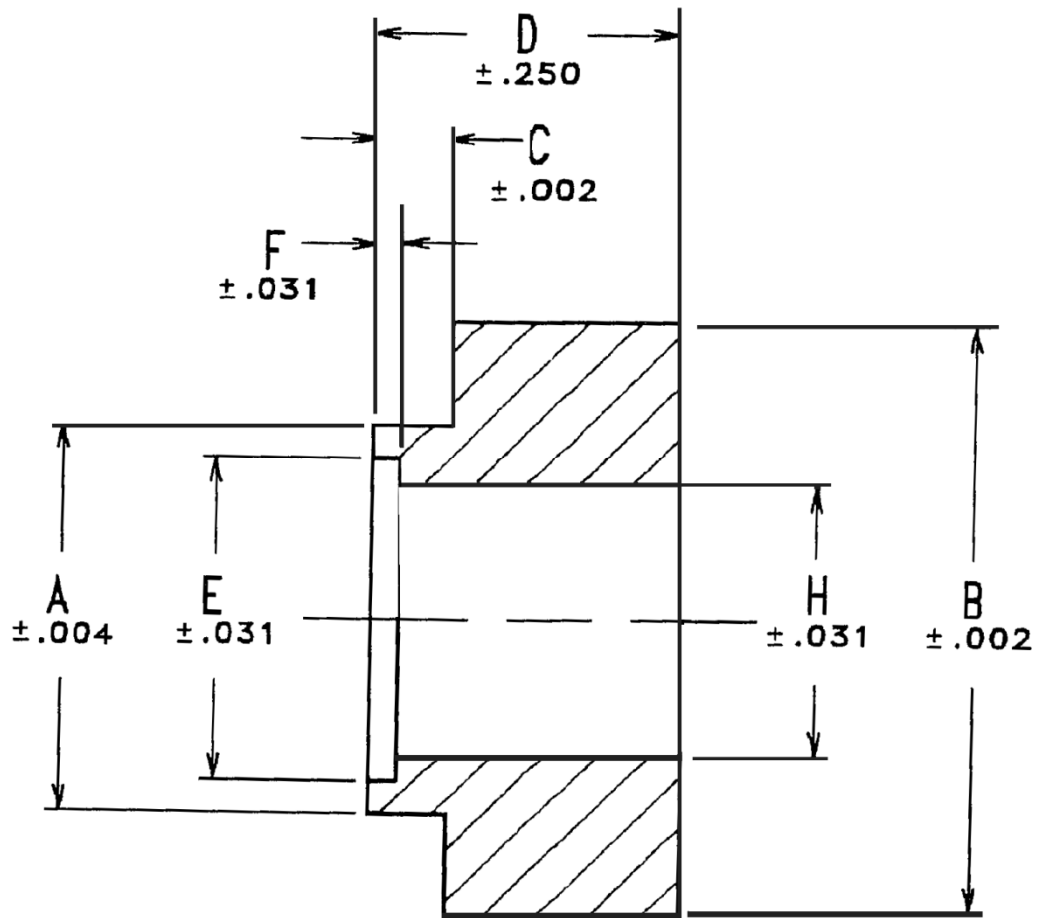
2 – GEAR DRIVEN – SK2150
